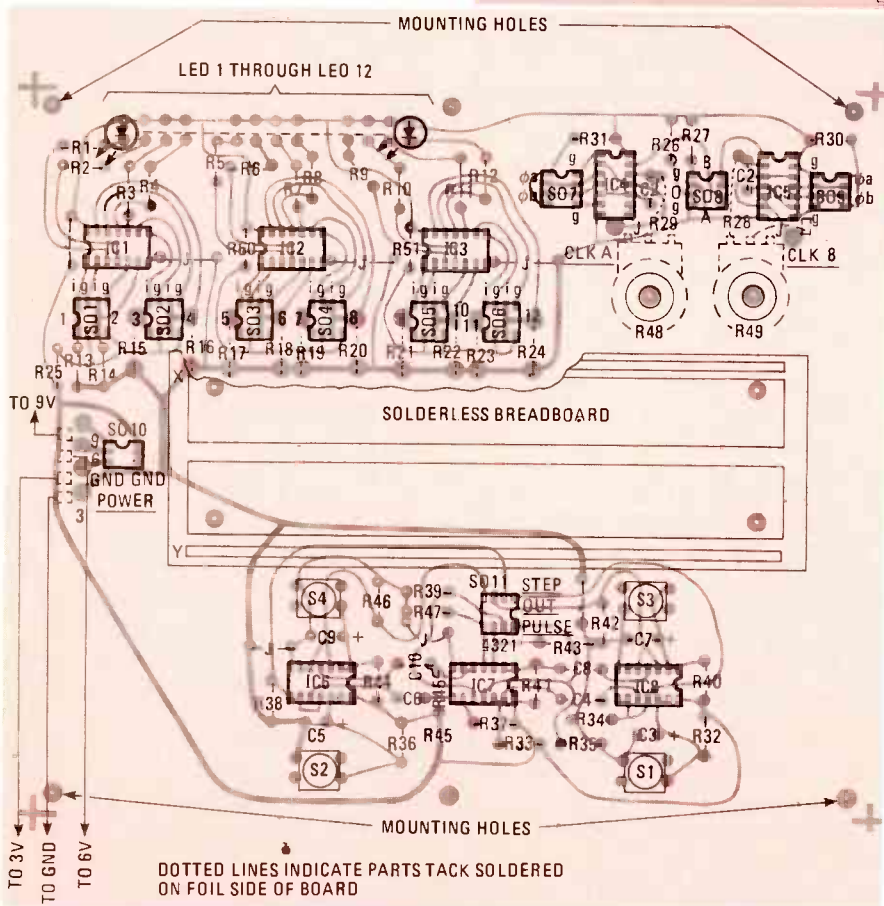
SOLDERLESS BREADBOARD is mounted in middle of board using four sets of 6-32 hardware.
